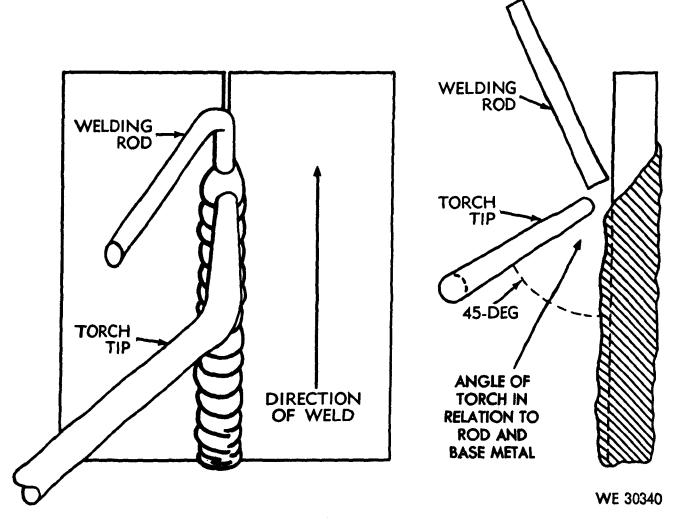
Welding a butt joint in the vertical position.
